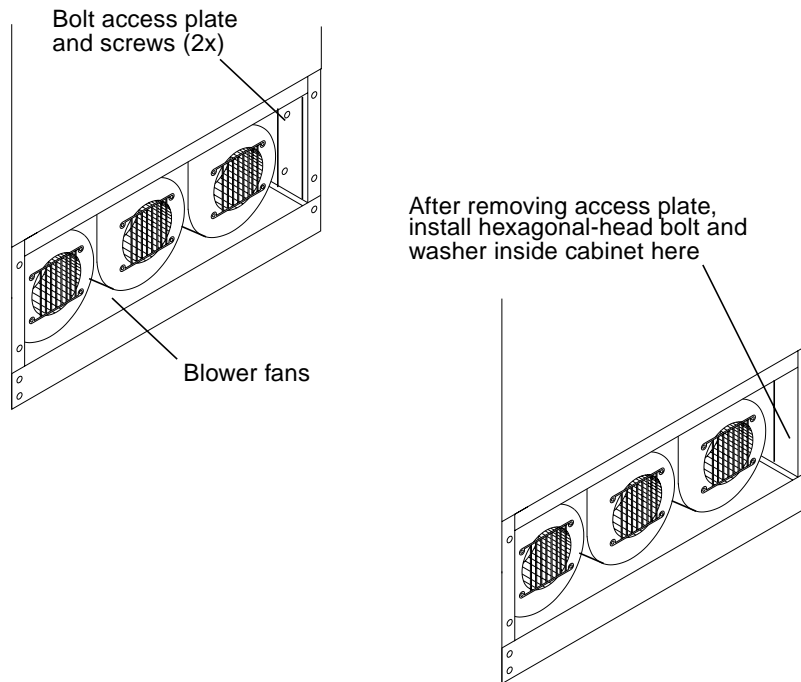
System Cabinet Front, Bolt Access Plate and Screws
